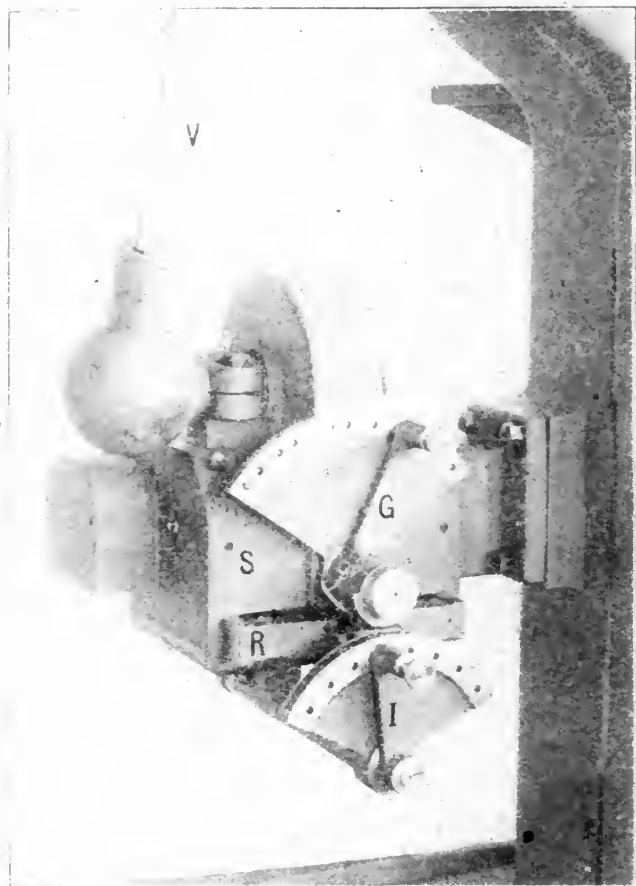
LONG VIEW OF LOWER GEAR BOX
